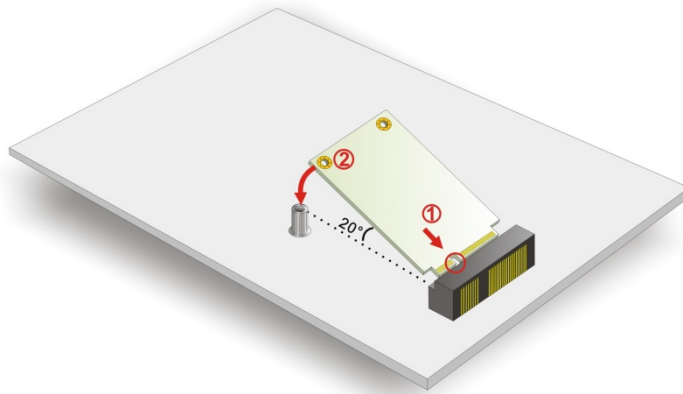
Inserting the PCIe Mini Card into the Socket
